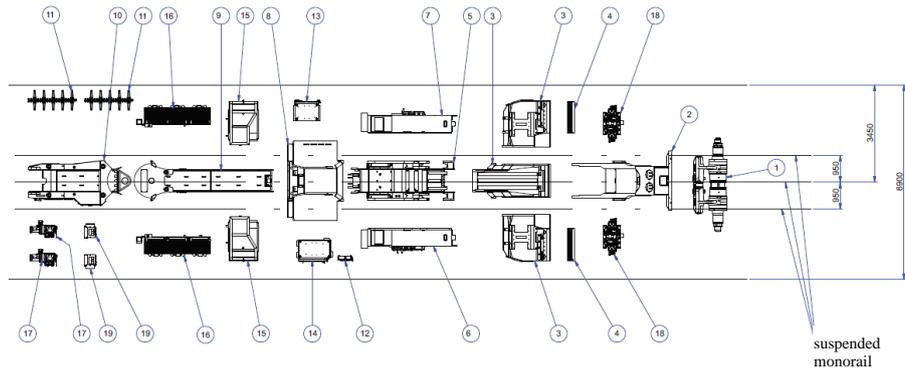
Subassemblies of the JOY 12CM30 machine [130]
